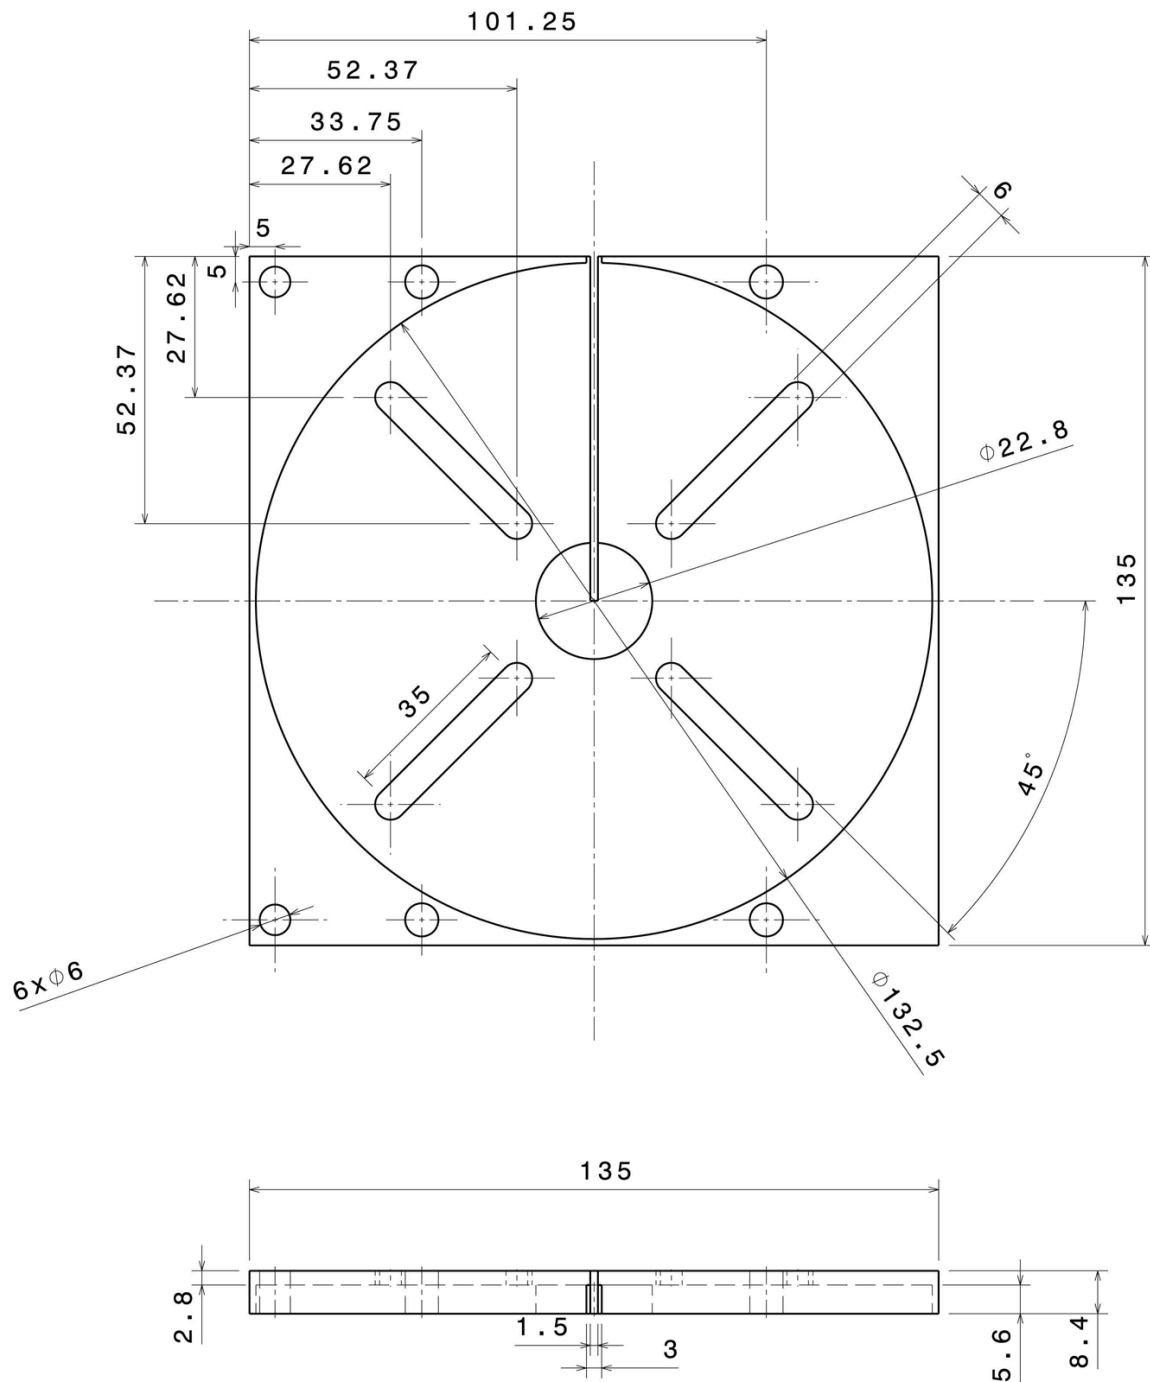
Mount of a transport coil (dimensions in millimeters).
